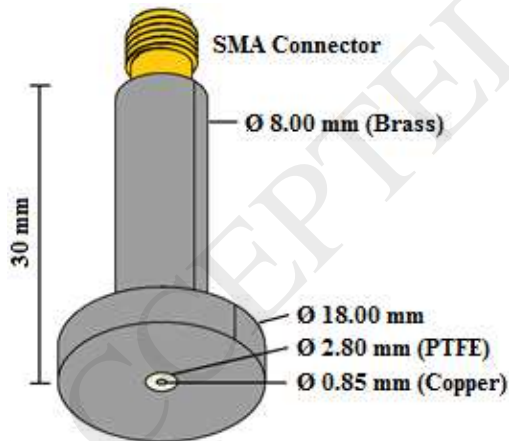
Dimensions of the proposed open-ended coaxial probe
